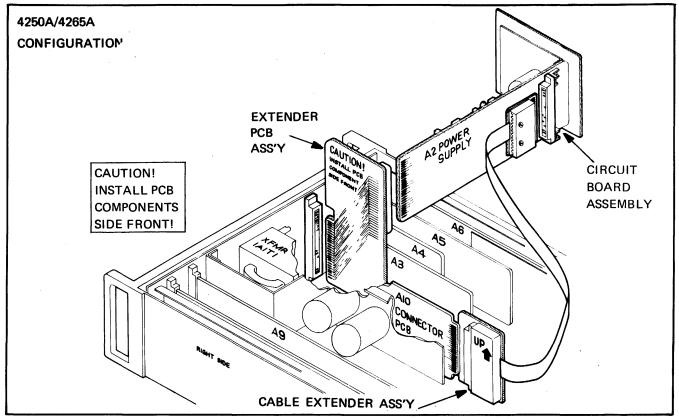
EXTENDER PCB AND CABLE EXTENDER ASSEMBLIES INSTALLED IN 4250A/4265A INSTRUMENTS
